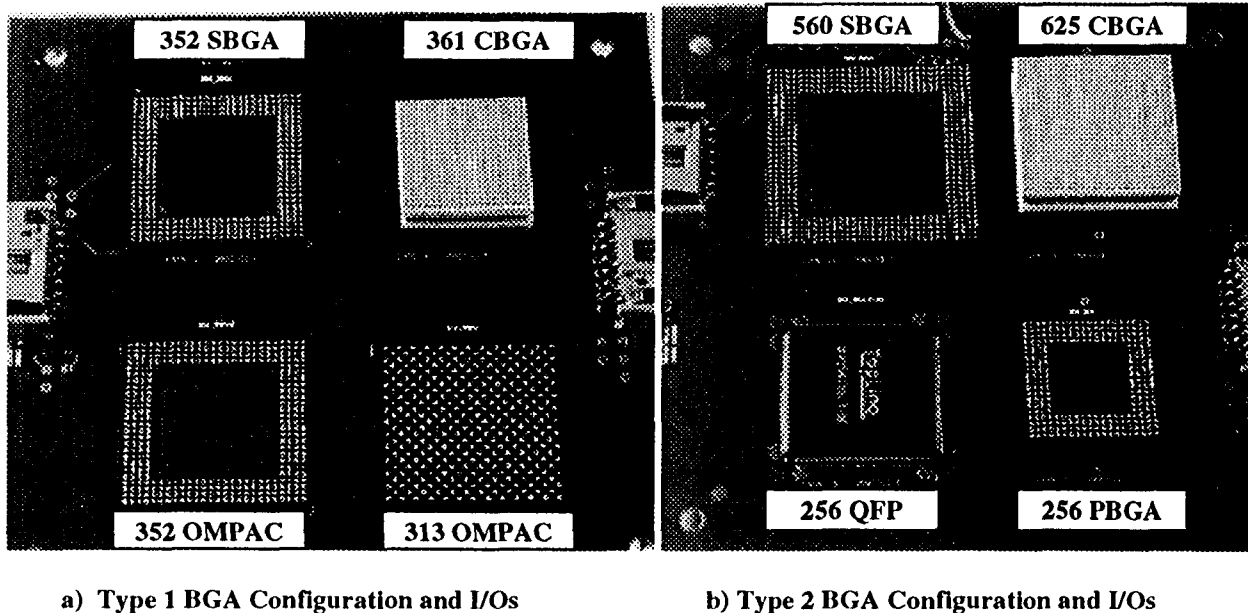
Test Vehicles with Unassembled Parts Topping Assembled Ones
